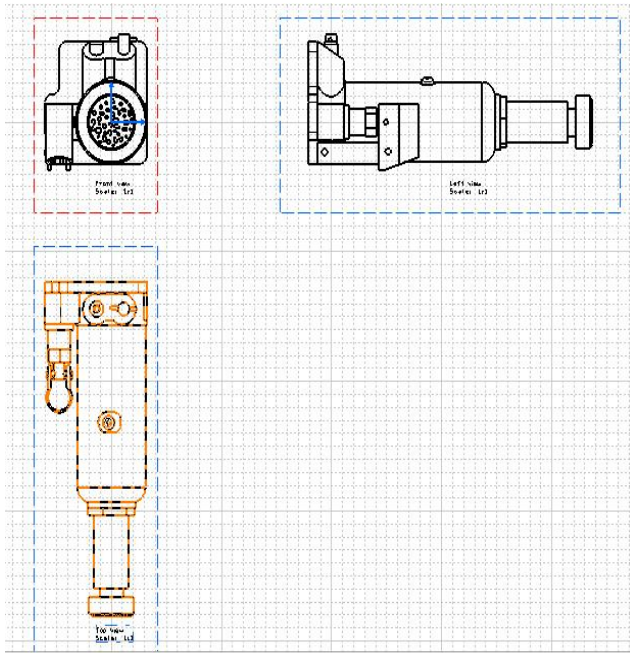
2-D drawing of the bottle jack –Model No. QYLS5
